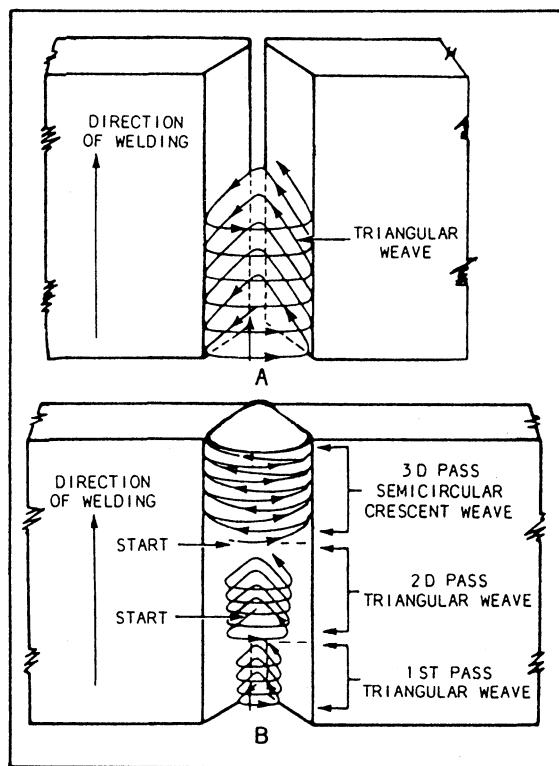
Butt joint welding in the vertical position.
